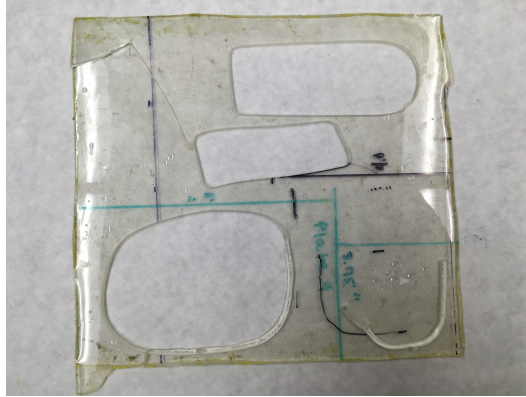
CNC machined SMP sheet created by self-leveling epoxy method.
